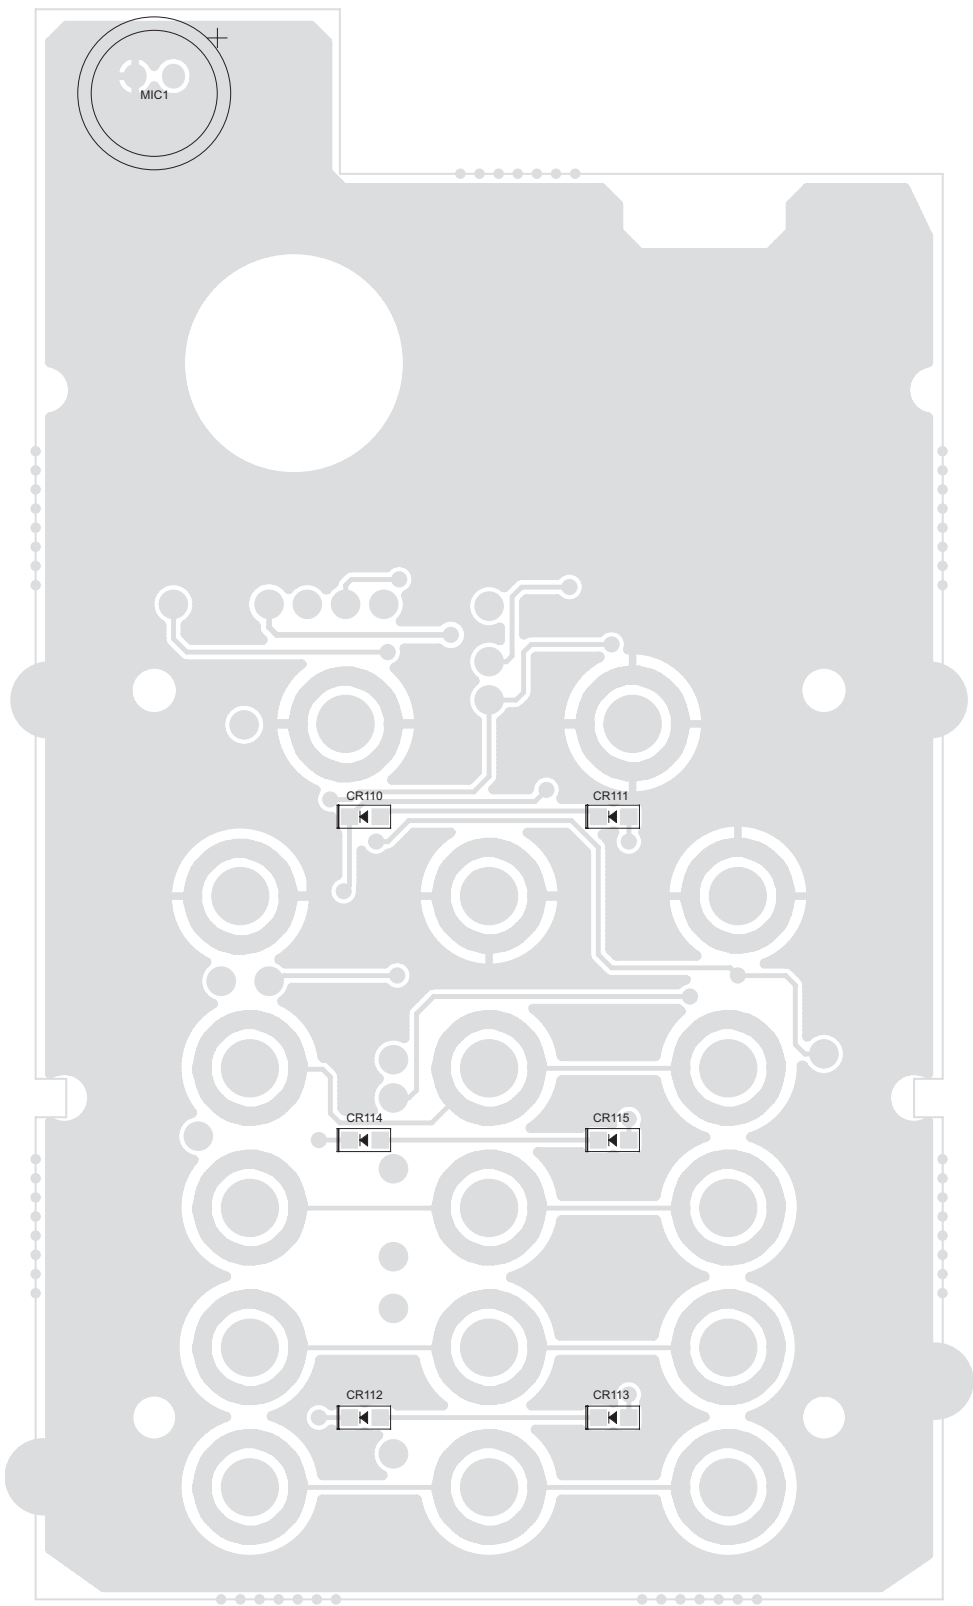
UHF2 R&TTE (435–470 MHz) Keypad Board: PCB No. E11-000886-00
